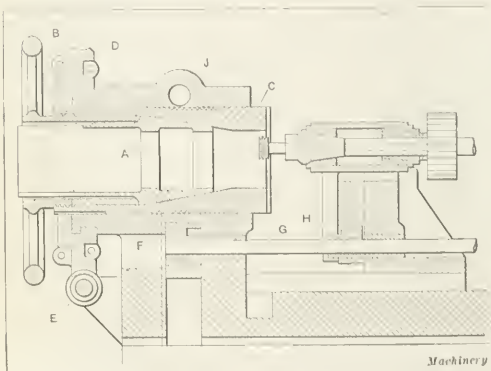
Diagram illustrating General Arrangement of Cutter- and Work-spindles of Thread Milling Machine
